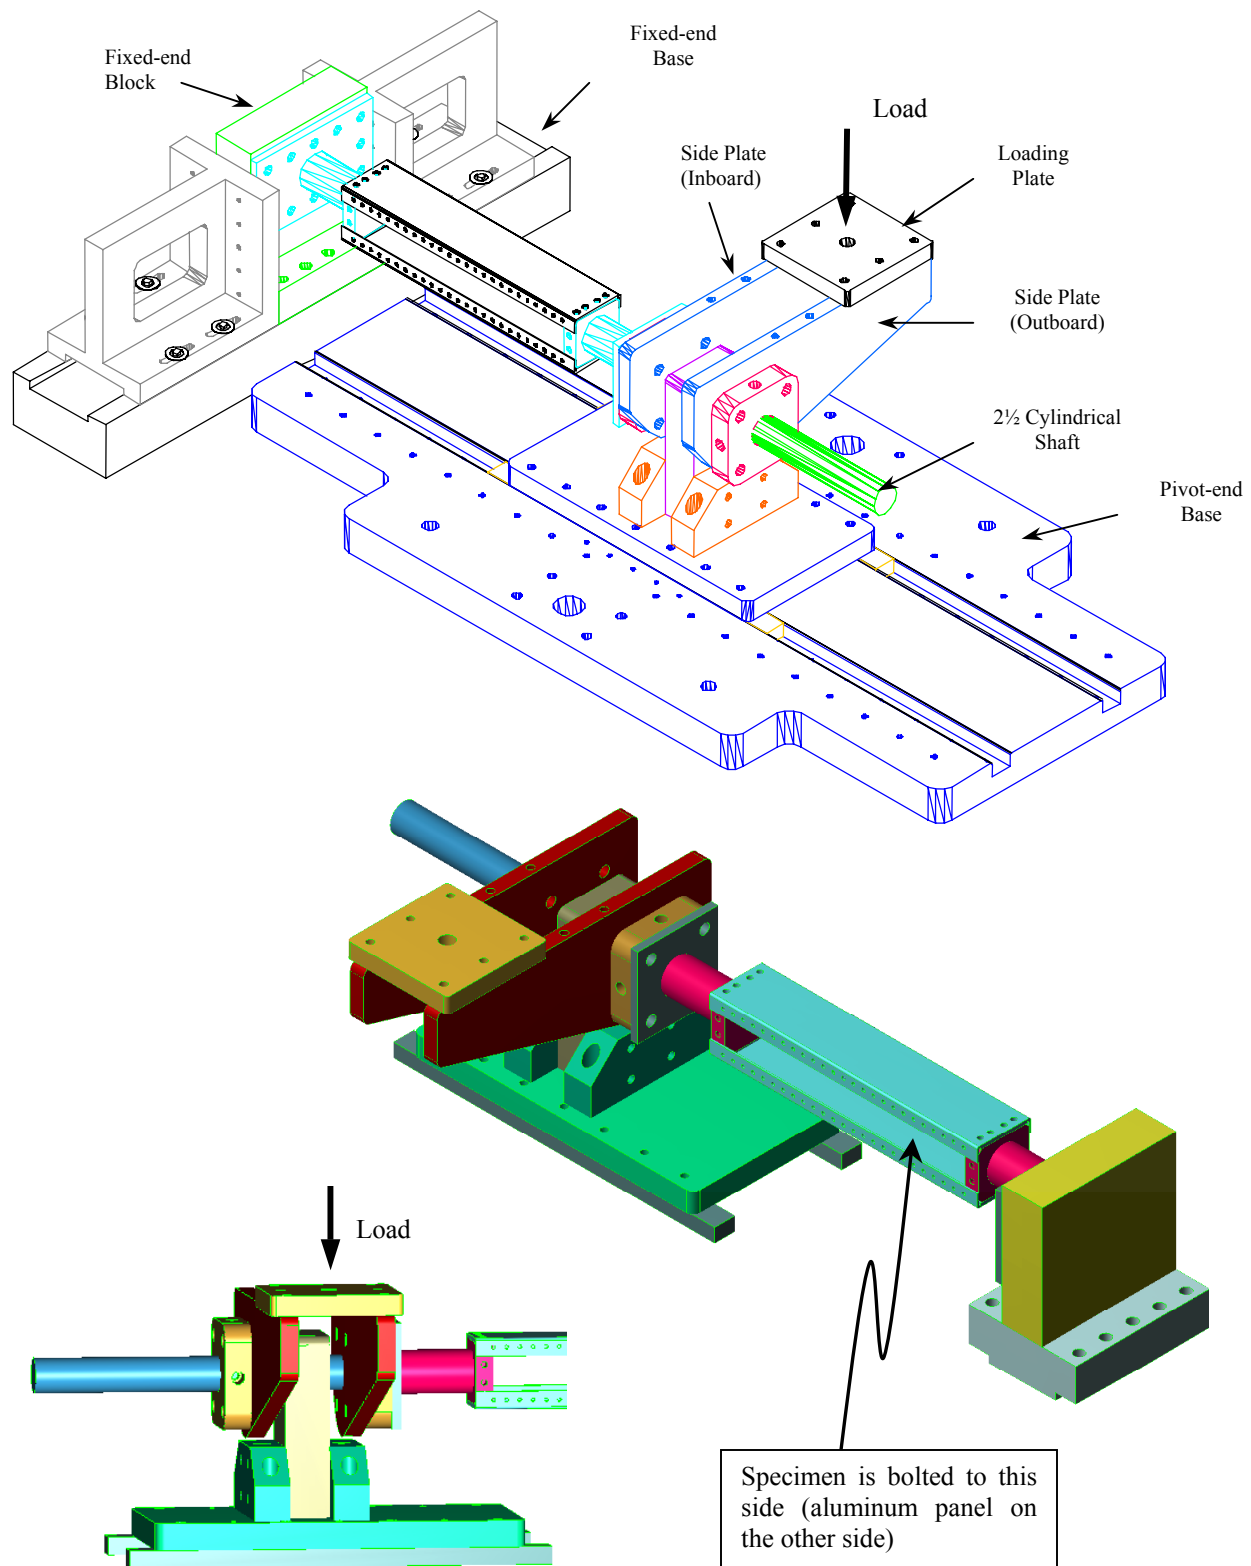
TEST SETUP FOR ADHESIVE BOX BEAM LAP SHEAR TORSION TEST
